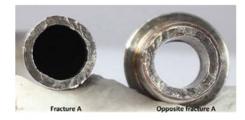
(b) The fracture surface (A) and its opposite fracture surface
